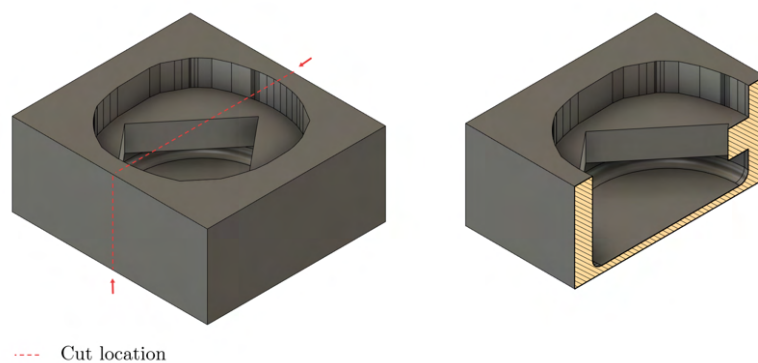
Final fitting hole prototype of the metacarpal region: test cube and test cube with a cut along the sagittal plane of the finger.
